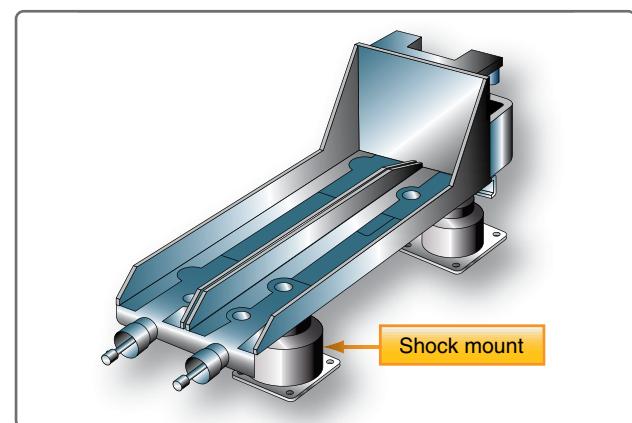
A shock mounted equipment rack is often used to install avionics.
